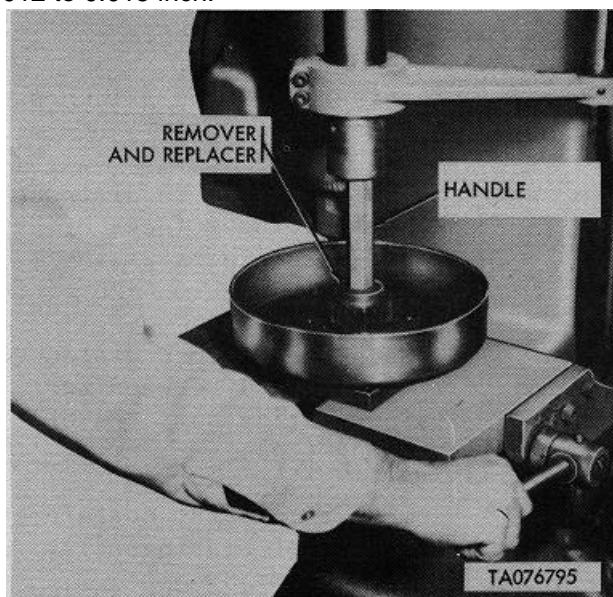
Brake Drum Assembly - Bushing Replacement Using Remover and Replacer with Handle
